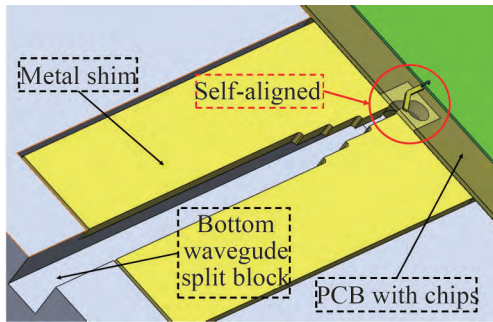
The metal shim self-aligns with the PCB by the removed place of copper
